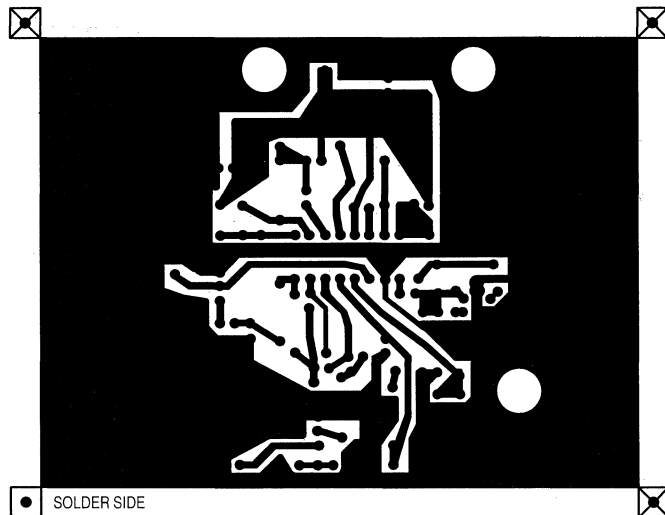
MC3372P PC Board Circuit or Solder Side as Viewed thru Component Side
